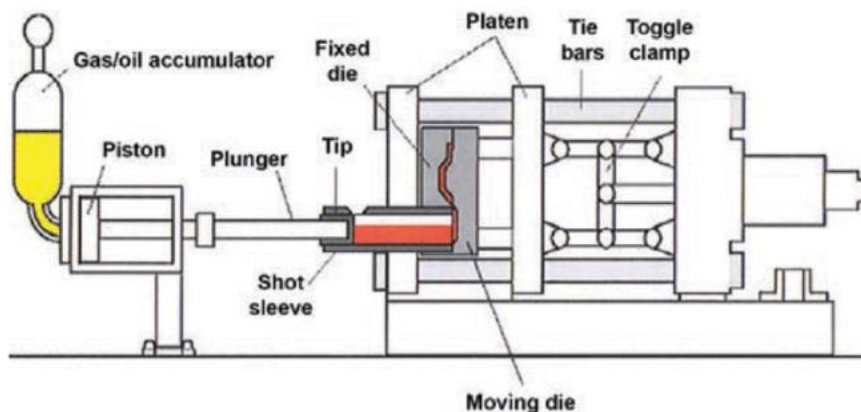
Schematic demonstration of the components of a horizontal cold chamber die casting machine [36].
